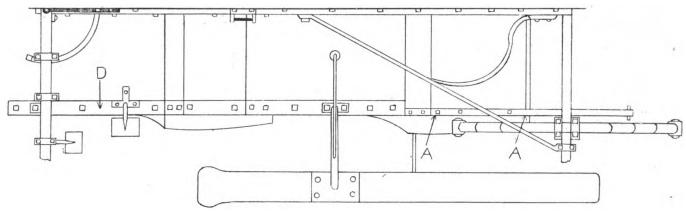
SHOWING BOTTOM PLAN OF RUNNING GEAR AND BOTTOM OF CABRIOLET.
